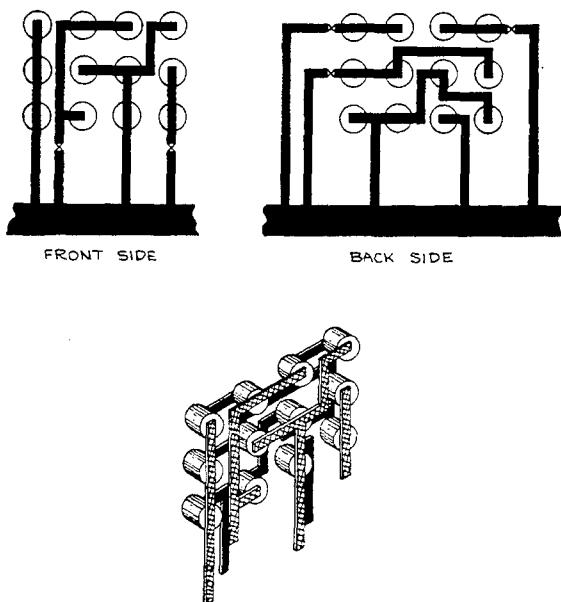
Universal connector strip circuits for parallel-tee network and pellet assembly.
